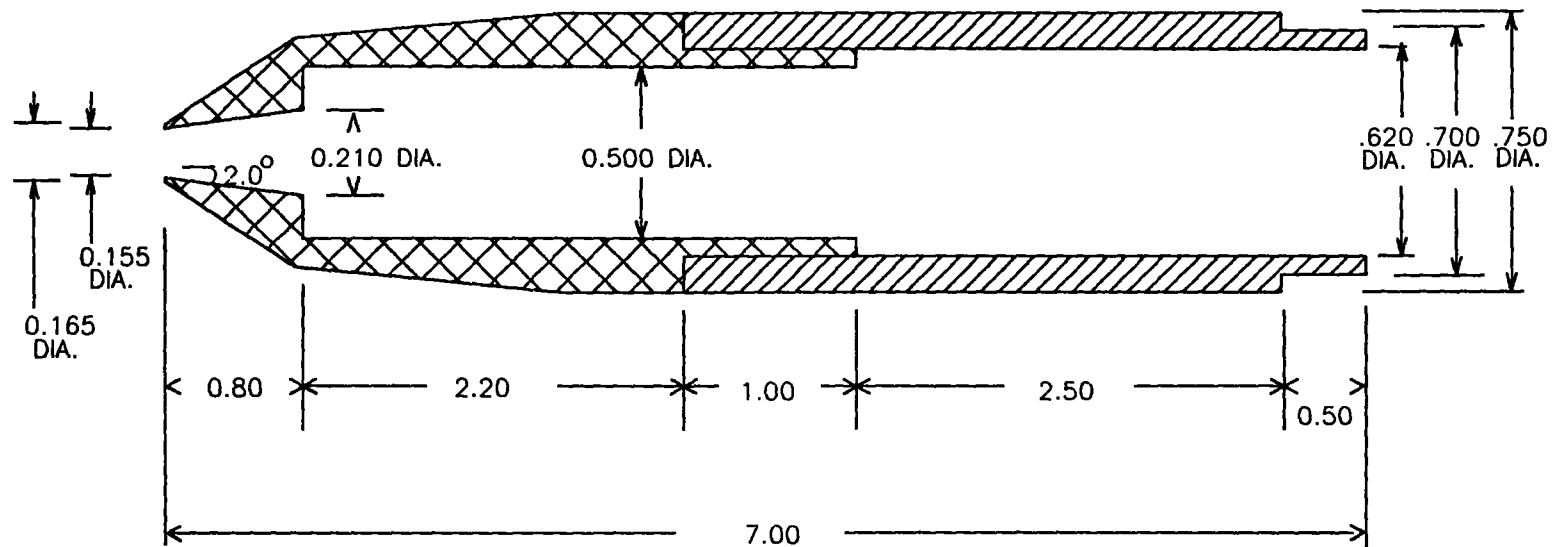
Detailed Drawing of Colket 2 Probe. The Dimension Units are inches and the Tolerances : Length = 0.01 in., Diameter = 0.005 in.
